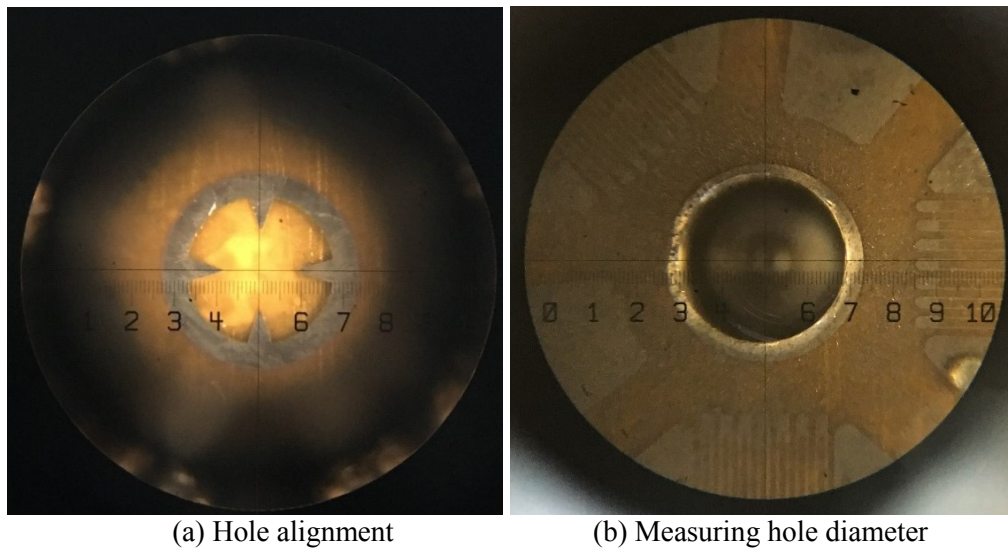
Gauge hole alignment and drilled-hole diameter measurement
